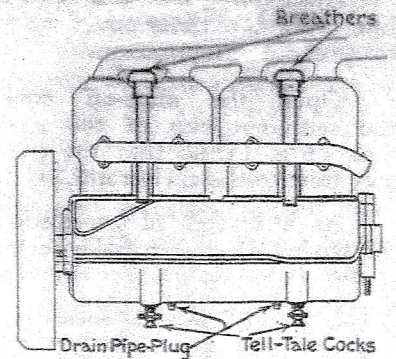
Pour oil into breathers, and test by tell-tale cocks (Model 69)
